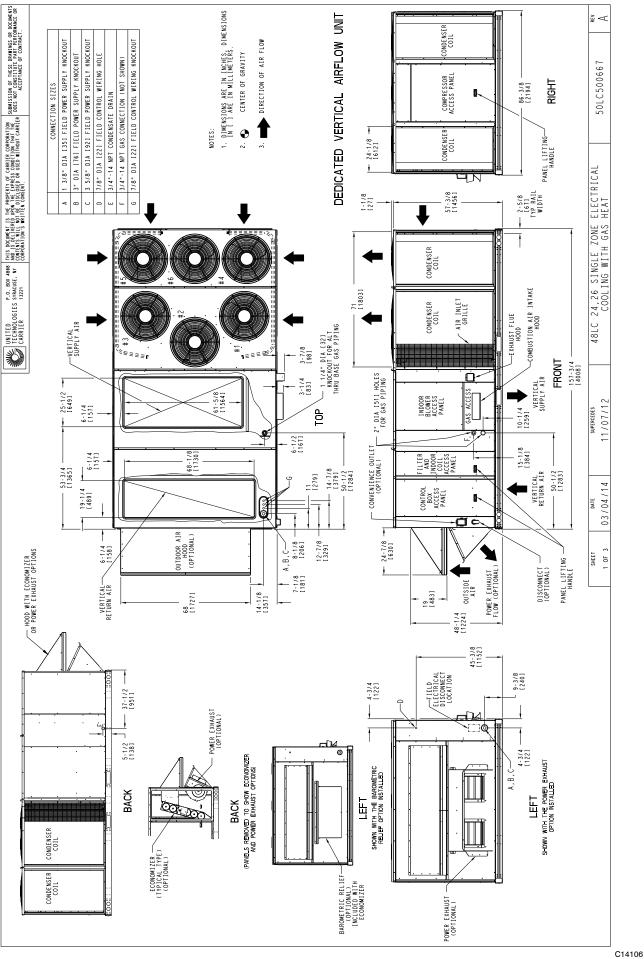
Unit Dimensional Drawing – 24 and 26 Size Units, Sheet 1 of 3
